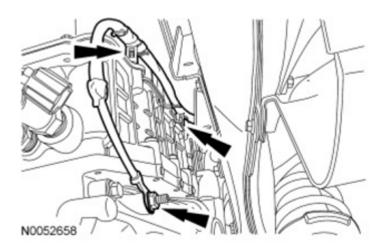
Locating Vacuum Pump Assembly Electrical Connector Courtesy of FORD MOTOR CO.
